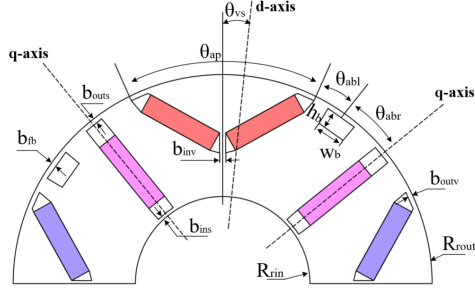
Rotor geometric model and main design parameters of the proposed AIPM machine.
